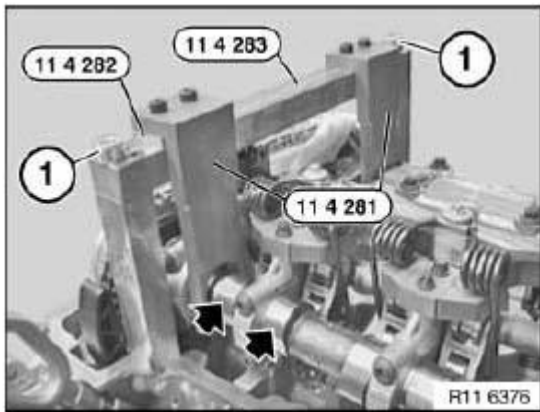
Identifying Special Tool (11 4 281), (11 4 282), (11 4 283) And Screws
